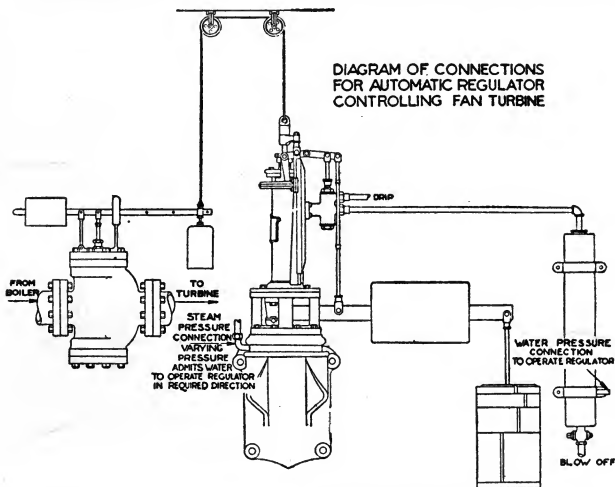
,655.—Sturtevant automatic steam regulator for controlling forced draught fan turbine.
